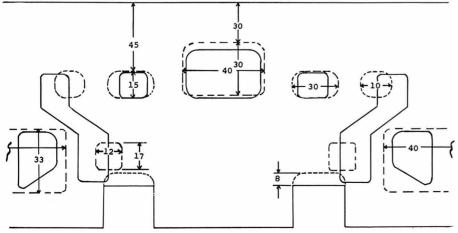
Comparison of R3 and R3 RR cylinder porting. All dimensions are in MM.
